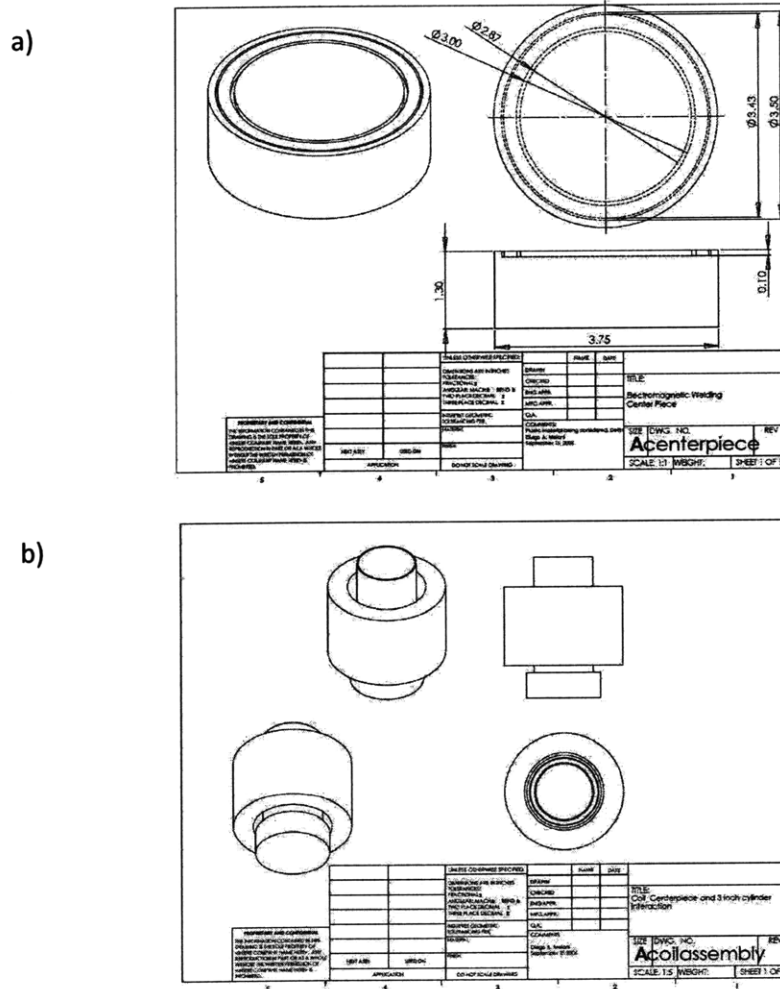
and 21b: Solidworks Drawing of the design of the manufactured workpiece holder and the assembly of the workpiece and the holder inside the coil.
